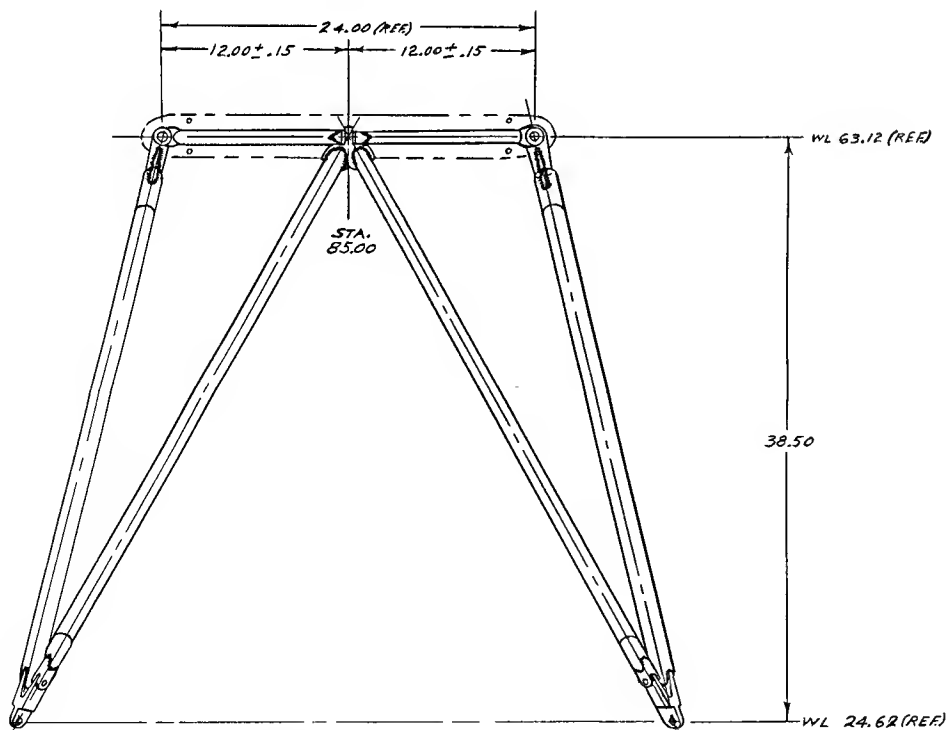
Left Side View of Engine Mounting Structure.
